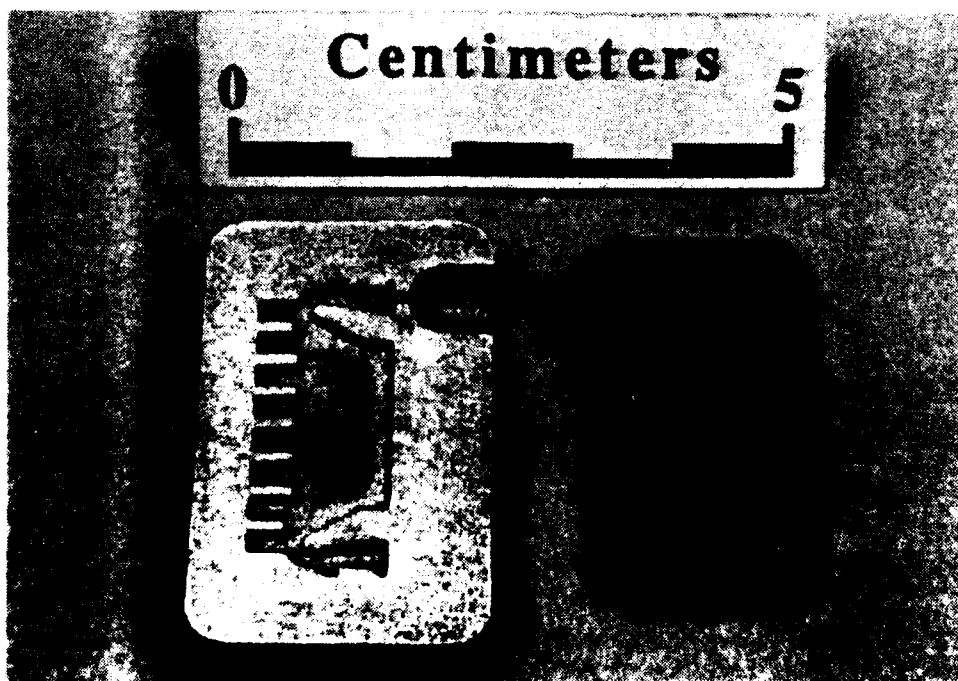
A Tooling Insert and an Injection Molded Polypropylene Part.
